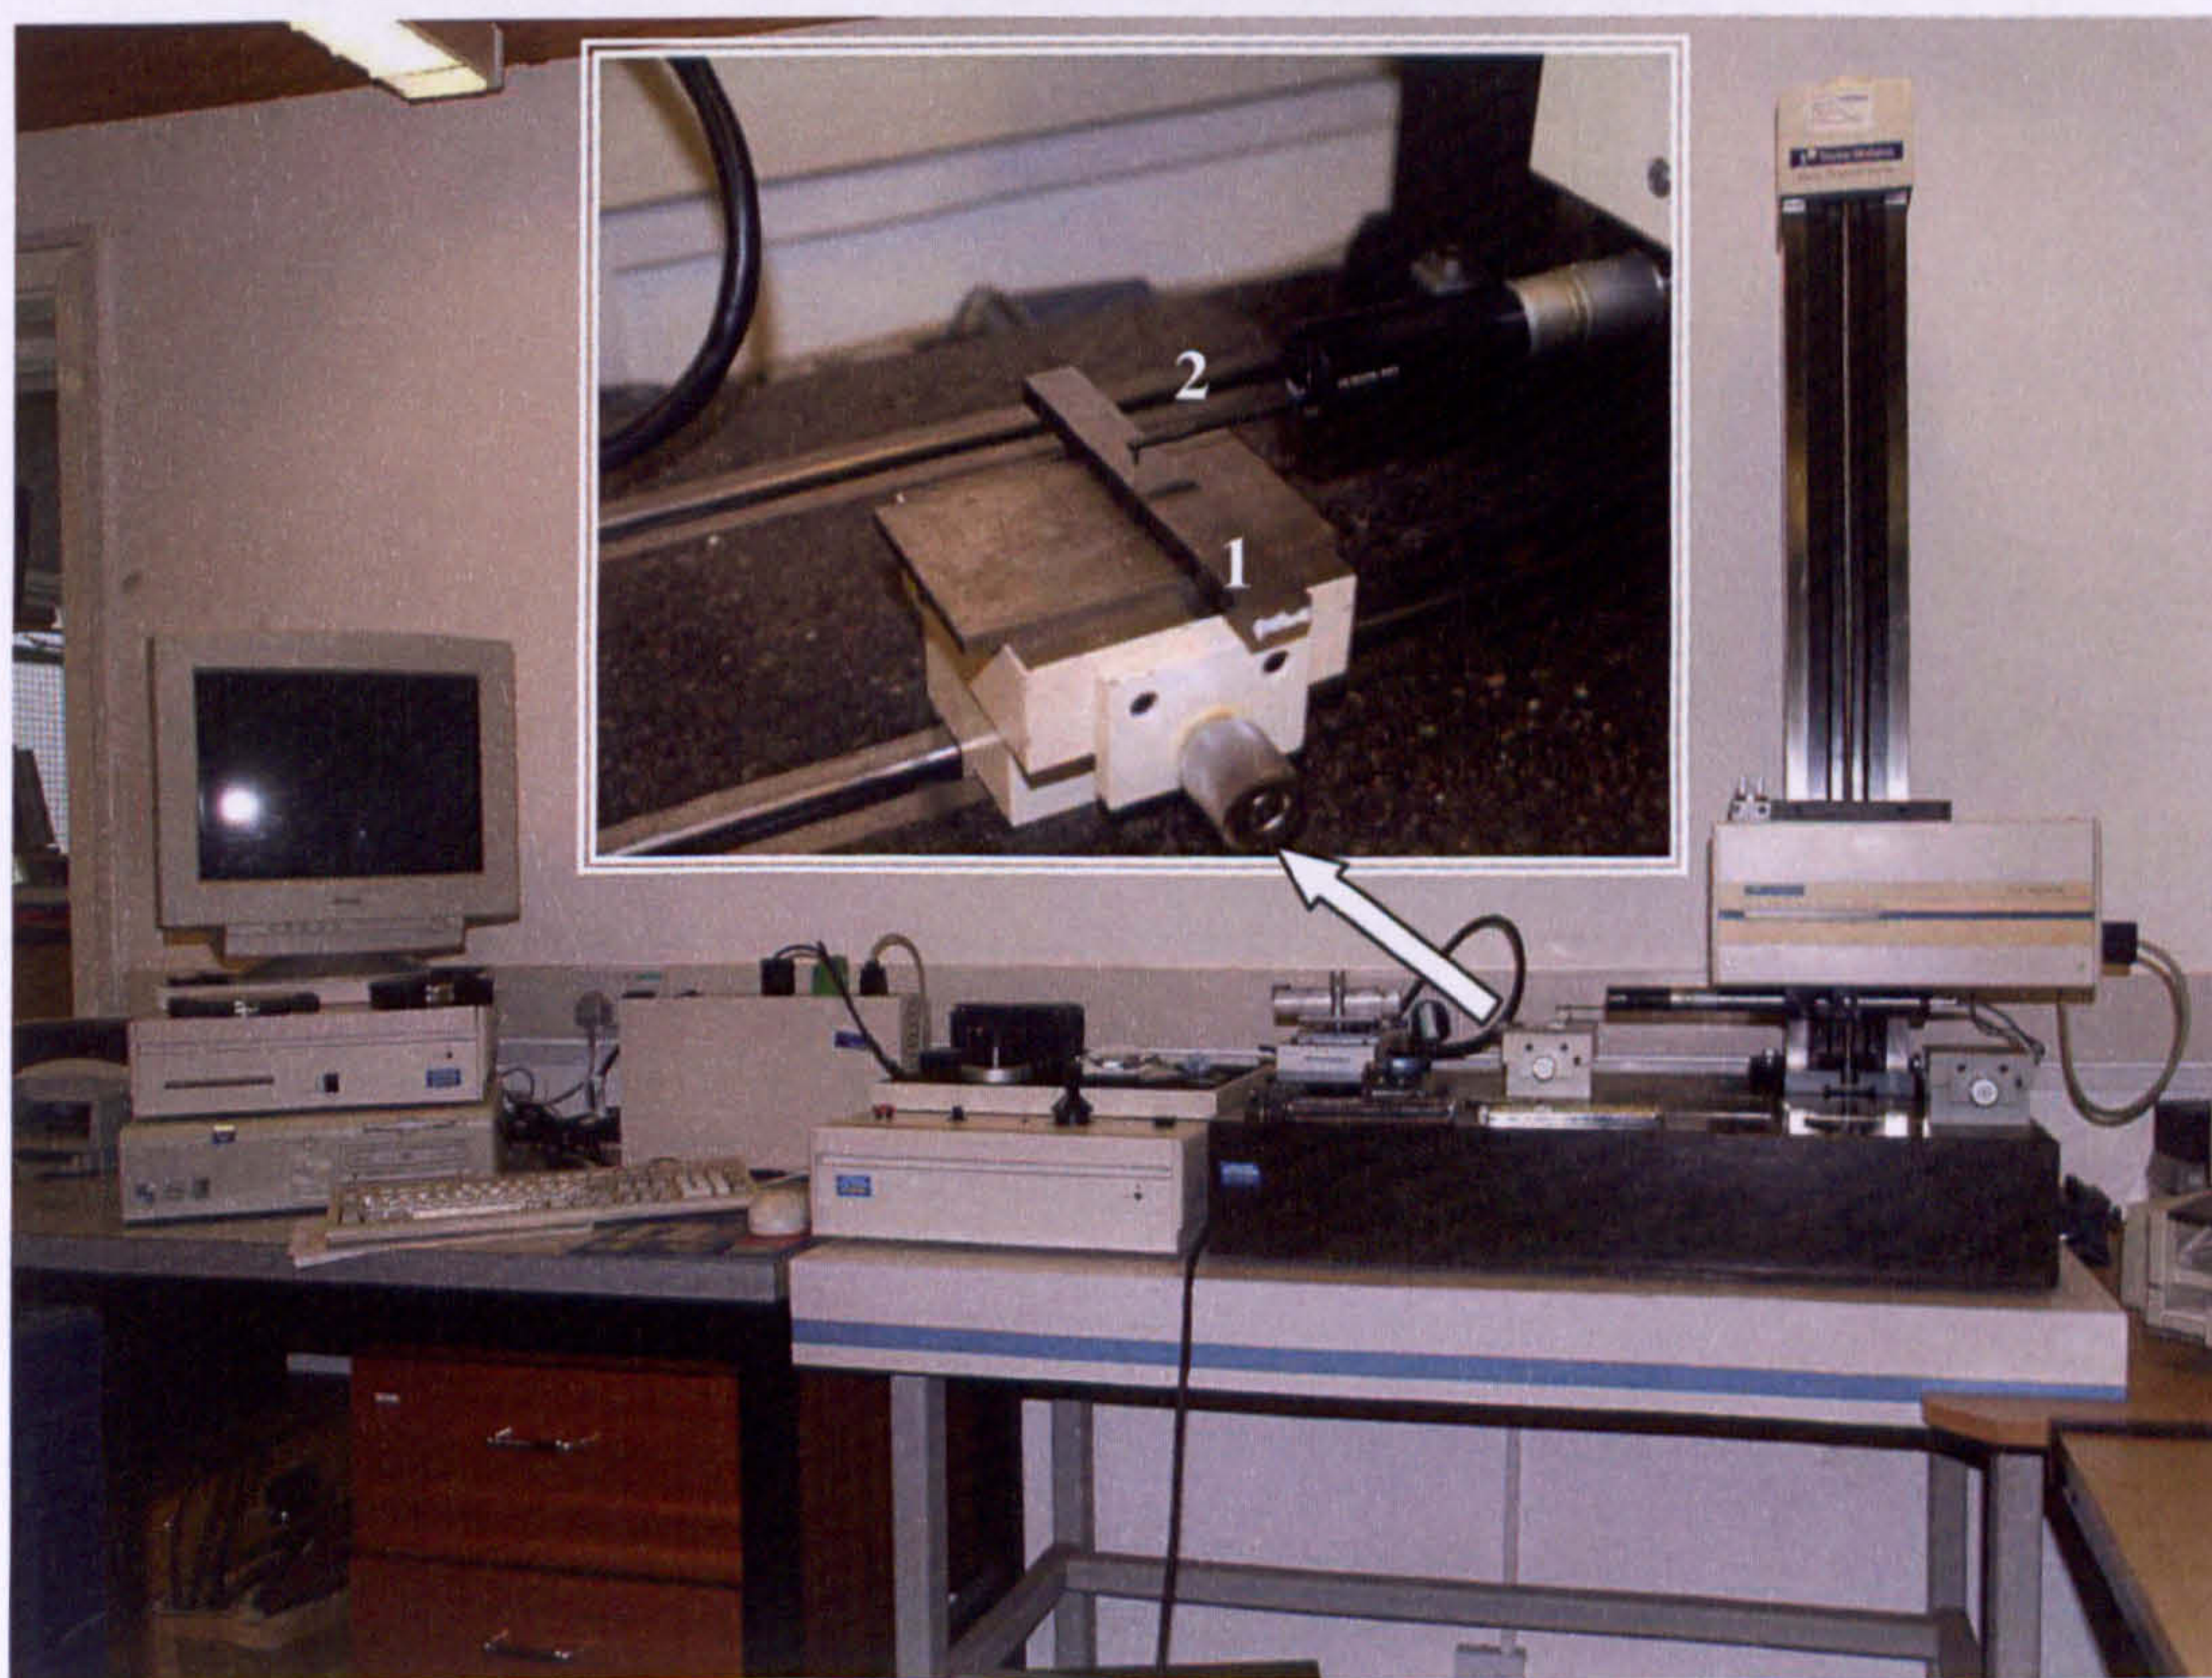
General view of workplace where measurements of surface roughness parameters R_a and R_z with Taylor Hobson were taken (1 – workpiece, 2 – stylus).
